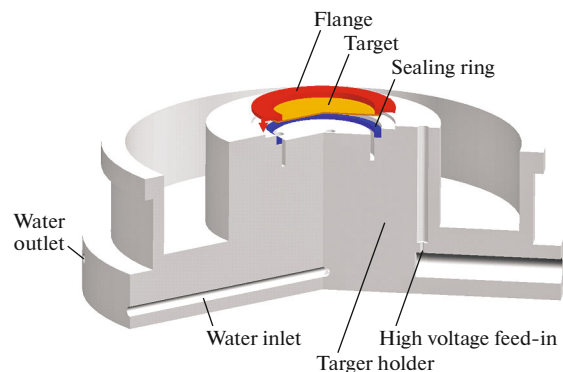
Drawing of the titanium driven-in target and its assembly.
